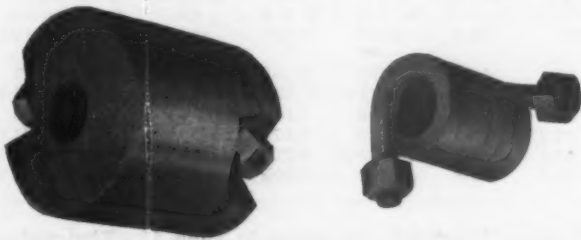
The Diescher Shaft Coupling and the Gripping Coil.
